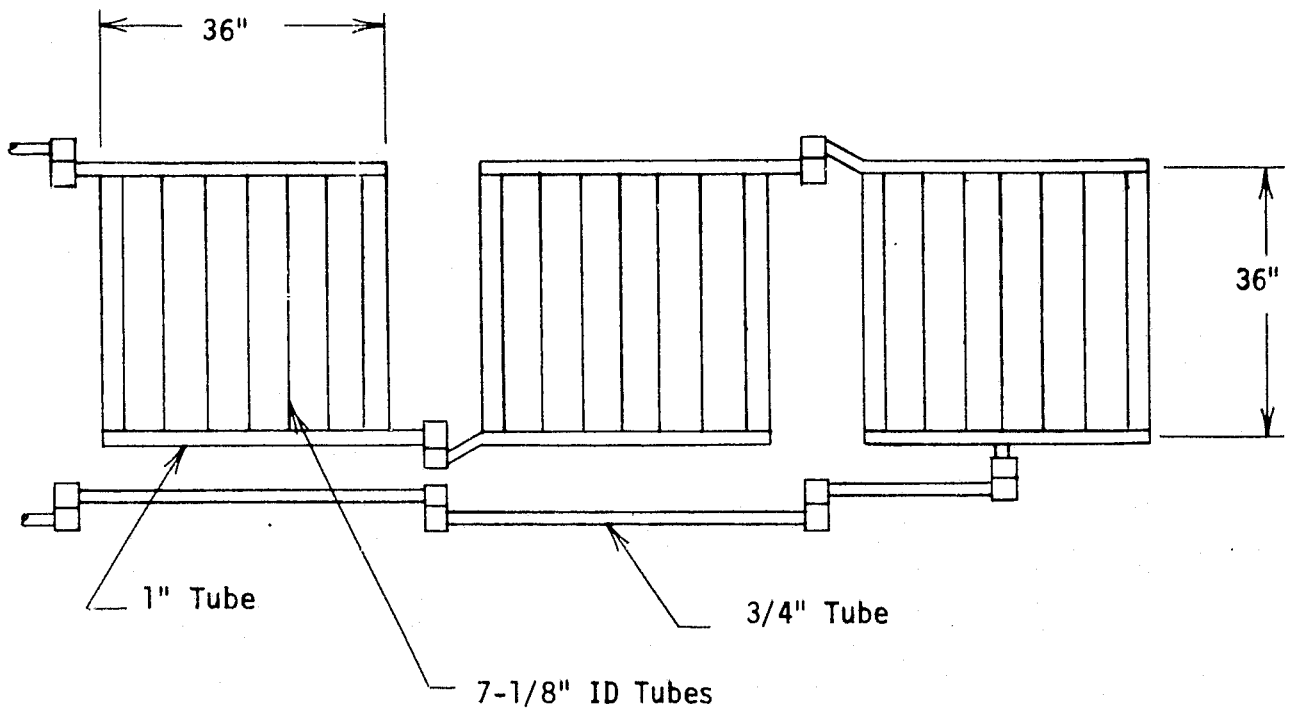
LABORATORY PROTOTYPE RADIATOR/CONDENSER
